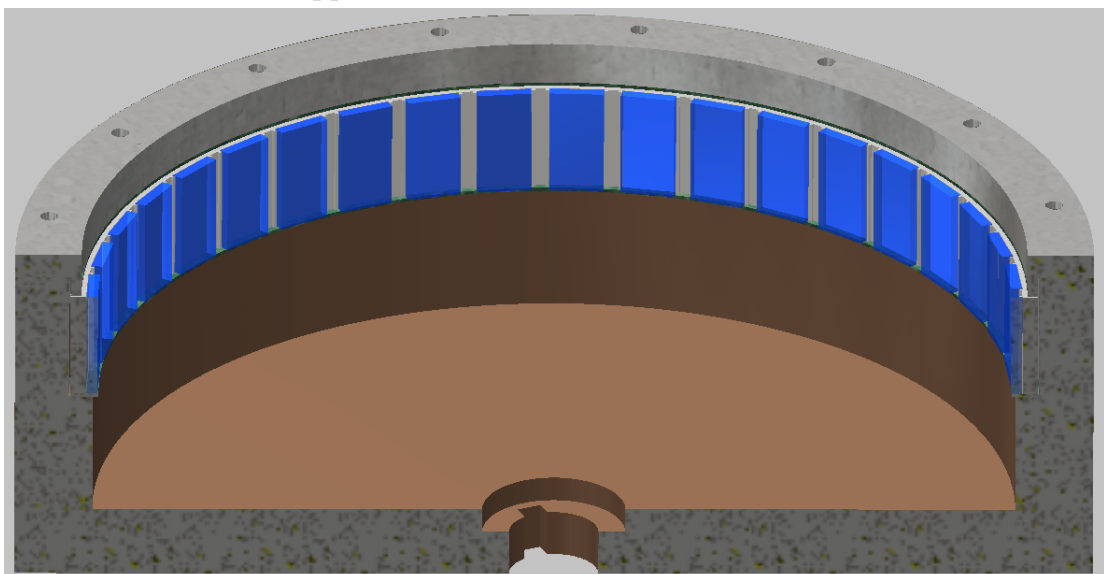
Complete rotor assembly of the machine in Appendix B.
